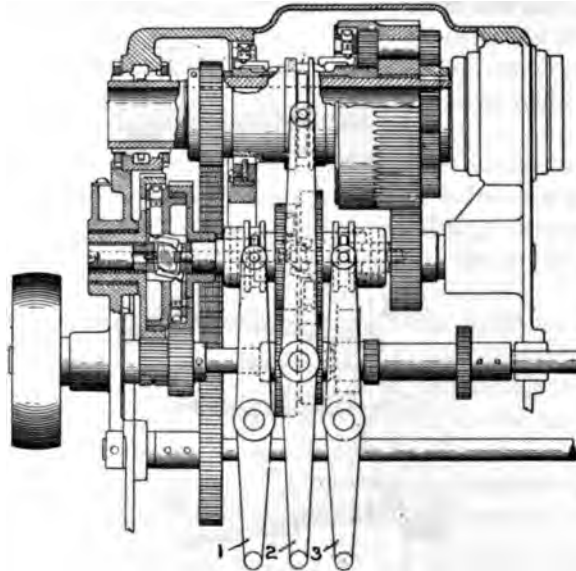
VARIABLE SPEED SPINDLE DRIVE OF AUTOMATIC LATHE MADE BY GISHOLT MACHINE CO.
